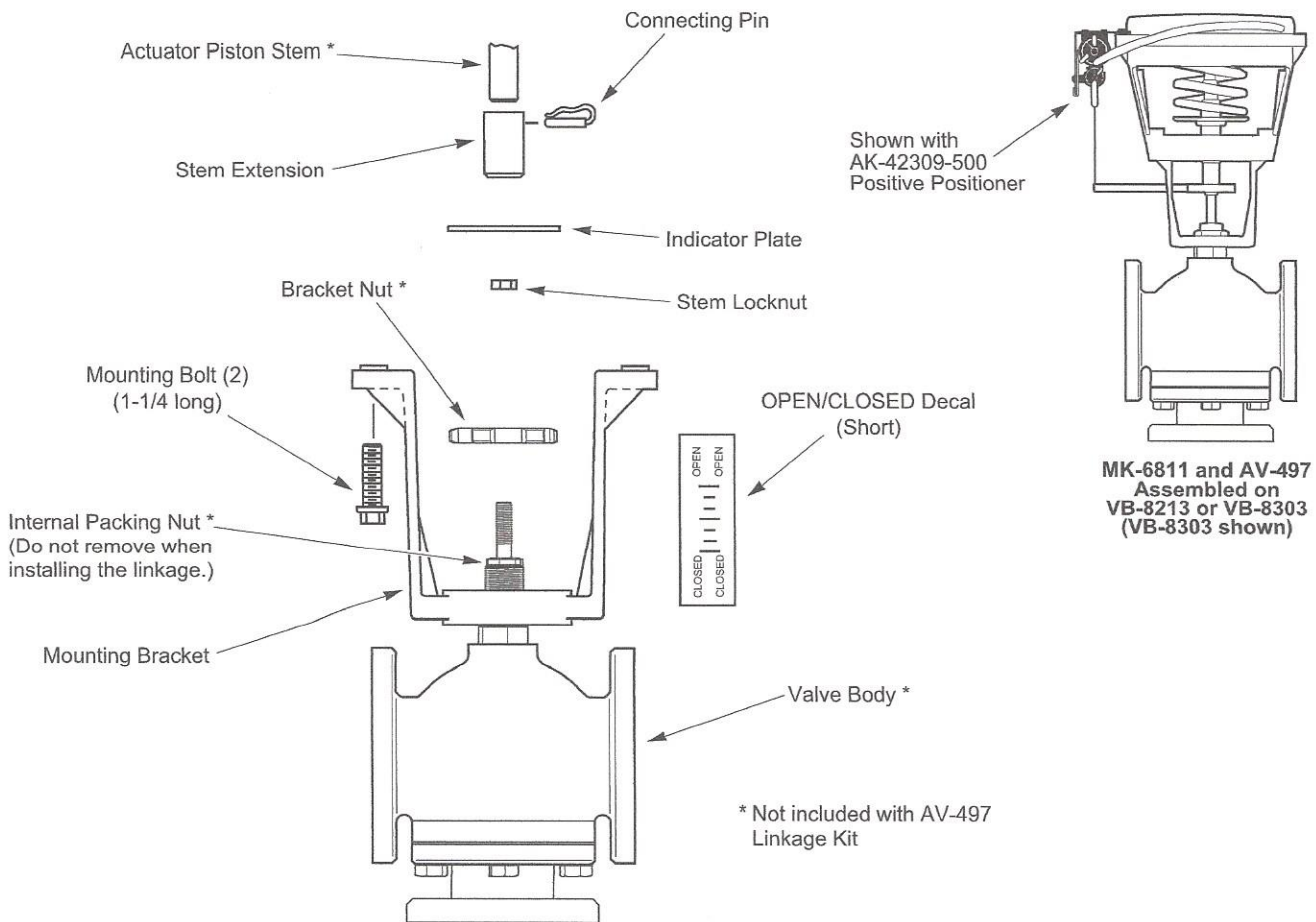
Valve Linkage Assembly for MK-6811 Actuator on 5" VB-8213 or VB-8303 Valve.
